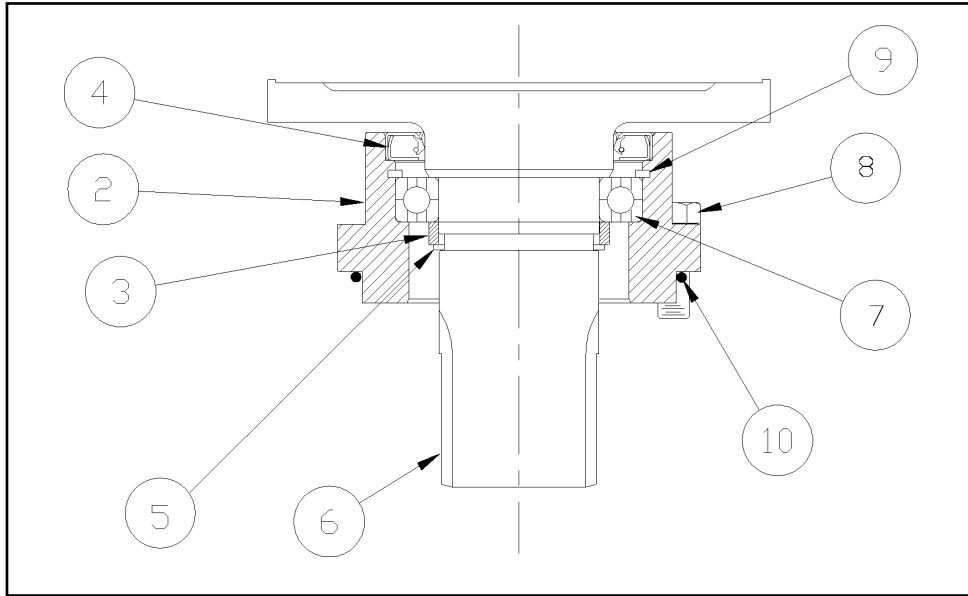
3" Input Shaft Assembly (item 18, fig. 4-5)
